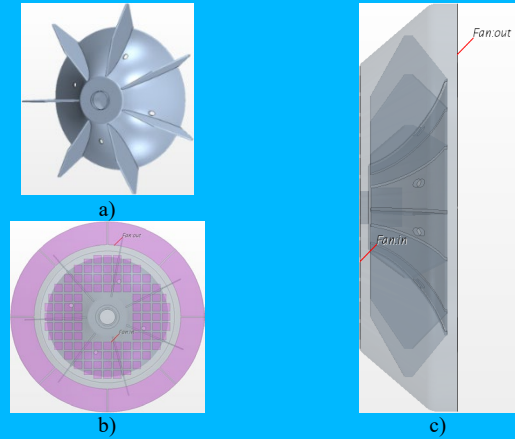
a) Fan to characterize and air model for the fan; b) front view, c) side view
